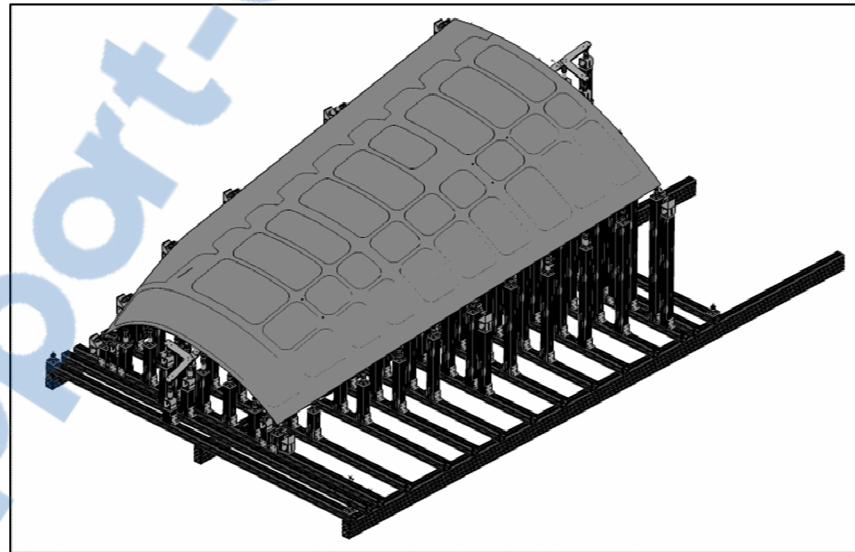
A costly, heavy, and complex fixture dedicatedly installed for the dimensional metrology of a non-rigid plate mounted on it, Bombardier Aerospace Inc.
